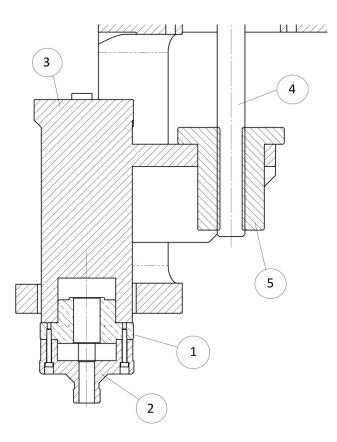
AFFRI[®] technical drawing of the head of the hardness tester, labelling the main
